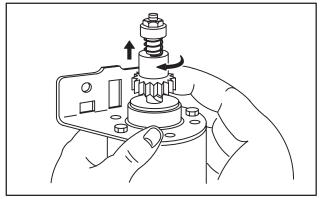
CHECKING STARTER MOTOR DRIVE
